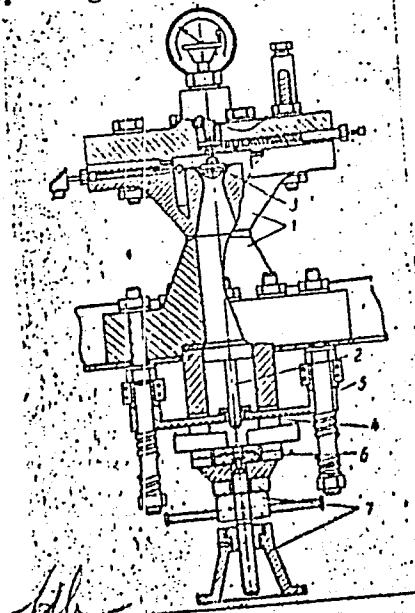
Machine for obtaining high pressures during evaporation of liquefied gas
